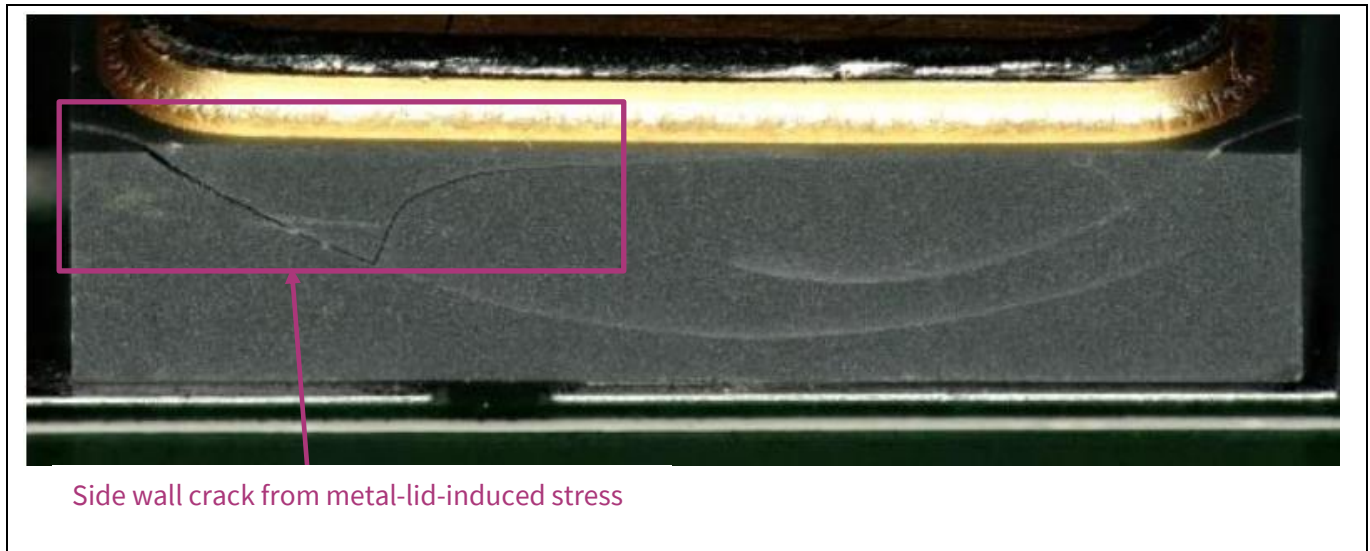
SMD-0.2 sidewall crack after PCB mounting
